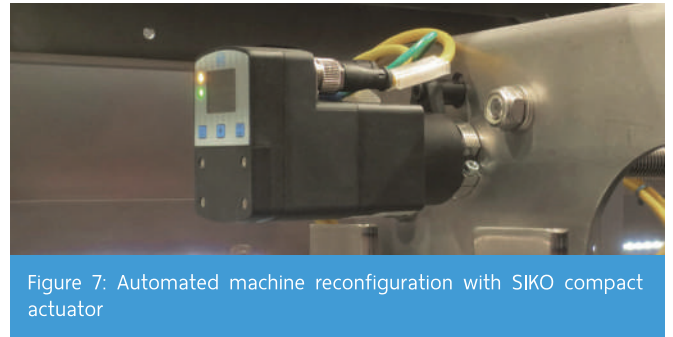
Automated machine reconfiguration with SIKO compact actuator
